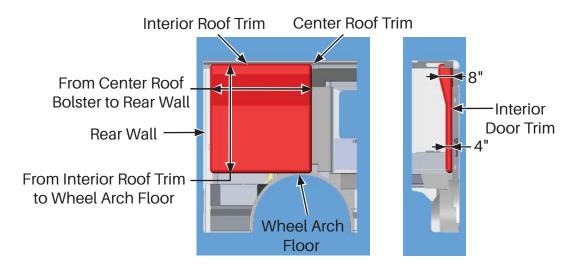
Driver Side - Rear-Side Air Bag Deployment Zone
